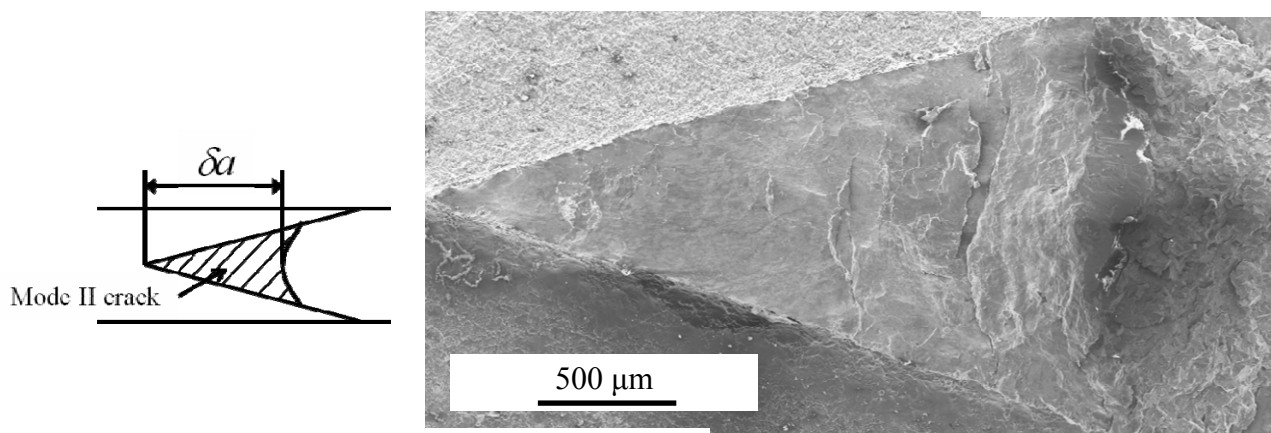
Fracture surface of Mode II fatigue crack
